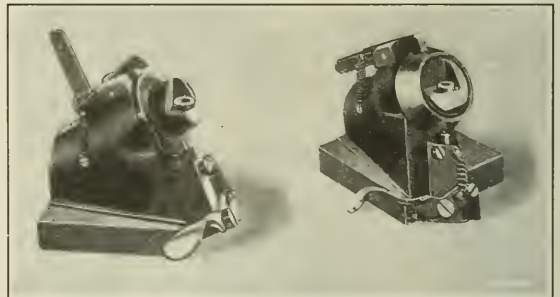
Two Views of Jigs used for drilling Flash Hole in Top Ring
